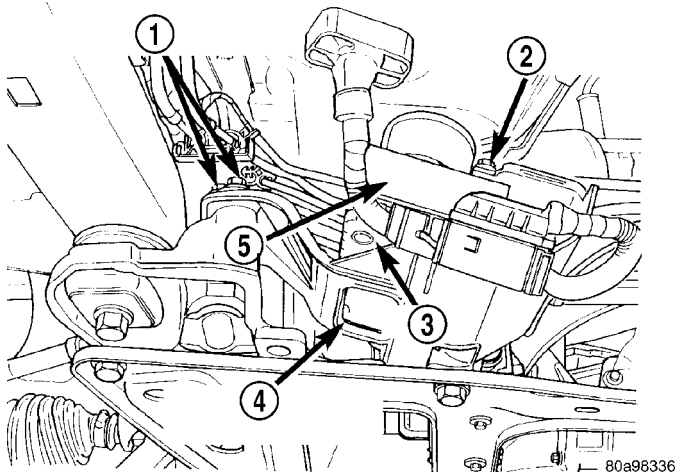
ICU To Suspension Cradle Mounting Bolts
